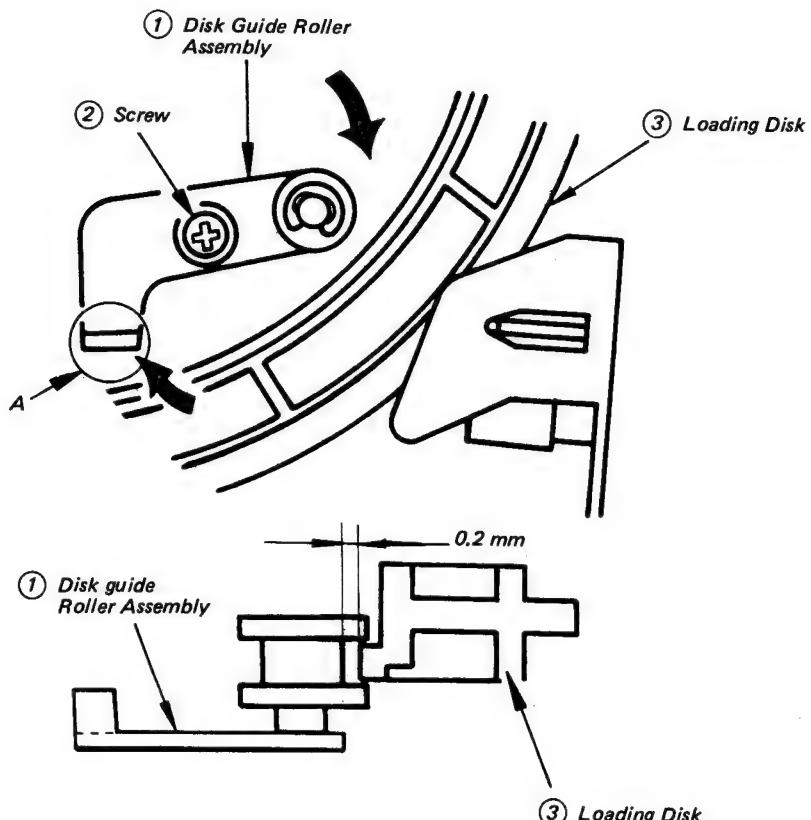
Disk Guide Roller Assembly Adjustment
